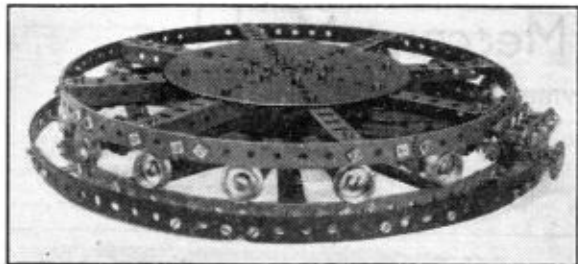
A built up geared roller bearing capable of carrying a heavy superstructure. It is designed by W. N. Cramer, Clinton, Illinois, U.S.A.
